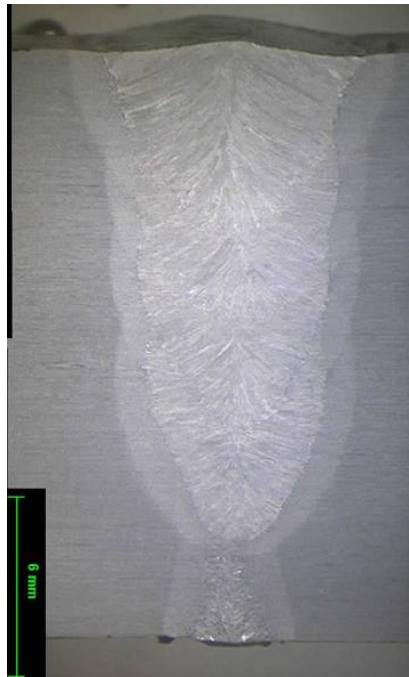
L1 Macro (No visible defects, flat root bead, 3.4 mm of laser weld remains after hot pass.)
